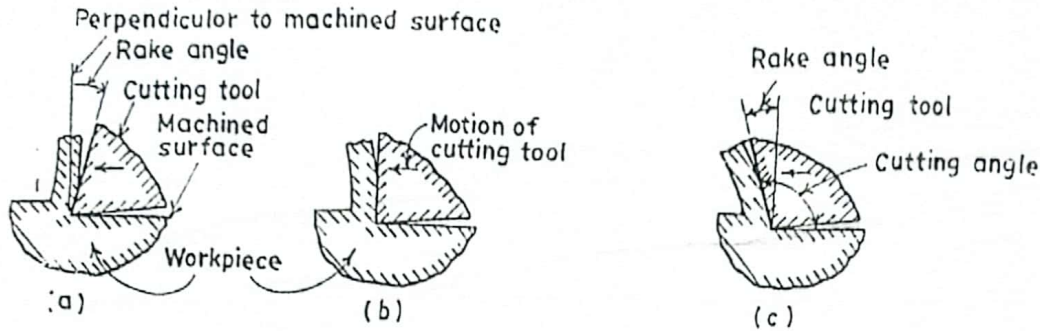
Different kinds of rake angles on cutting tools (a) Positive Rake Angle. (b) Zero Rake Angle. (c) Negative Rake Angle.
